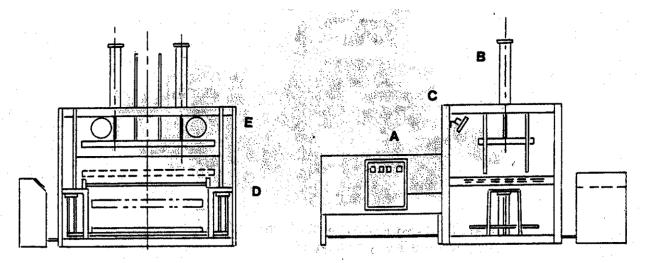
Single Station Cut Sheet Shuttle Press - Drypoll (14). A: Heater Zone. B: Pneumatic/Hydraulic Plug Assist. C: Auxiliary Free Surface Cooling Station. D: Forming Table. E: Vacuum Tanks. (Drawing used by permission of Drypoll.)
